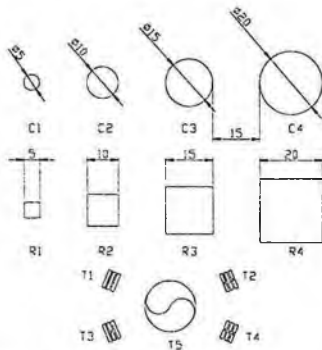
Sizes, Shapes, Locations of Corrosion Defect in Test Specimen
